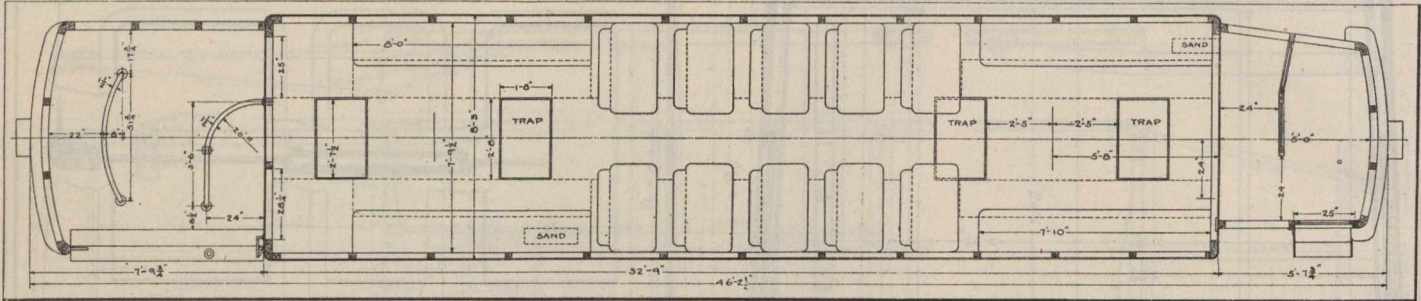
Layout of Car Showing Seating and Vestibule Arrangement.
